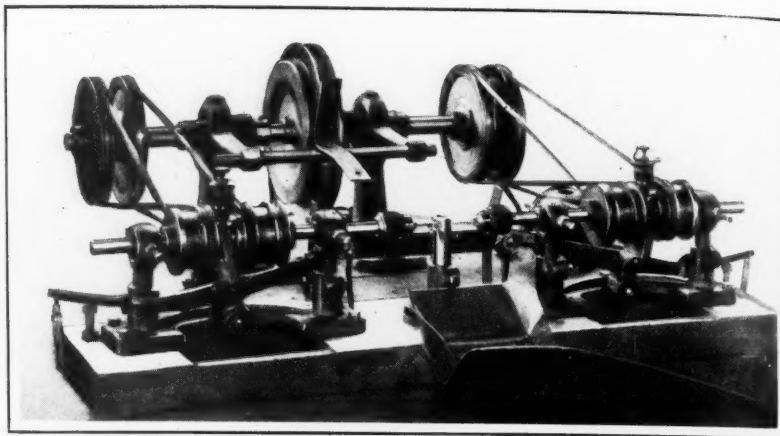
Bench-type Horizontal Two-spindle Drilling and Tapping Machine
